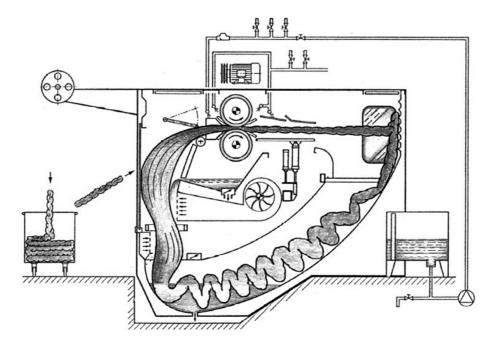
/14 – Schemes of milling machines showing the different operating steps
